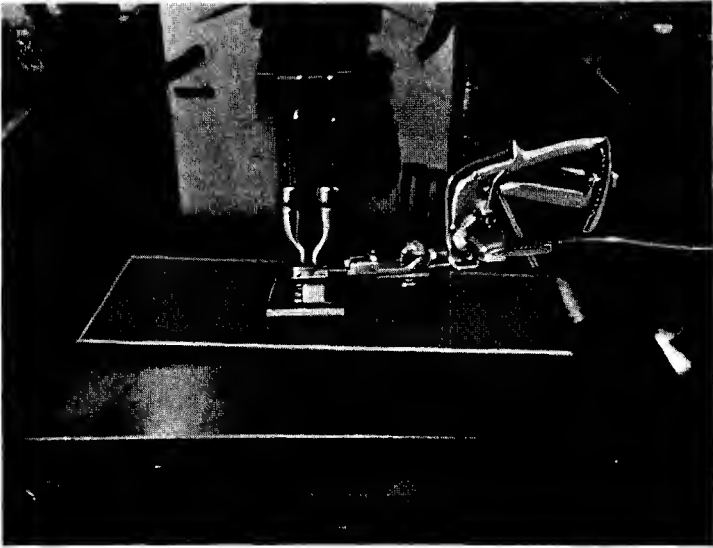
Band pulled tight with stretching tool—ready for spot welding
